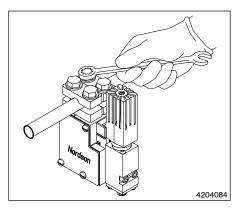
Tightening the Gun Retainer to the Mounting Bar
